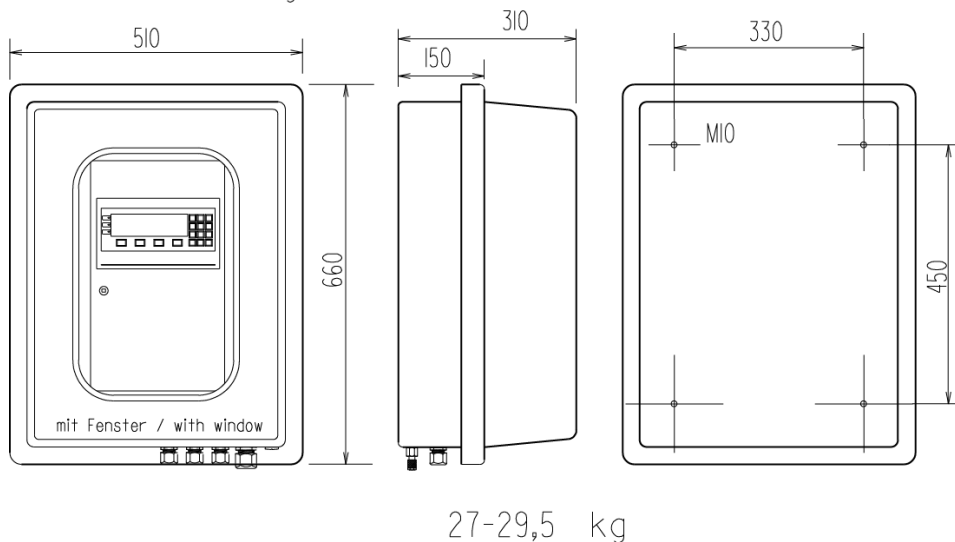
Dimensions (mm) of the Optional SME-56 GRP Cabinet
